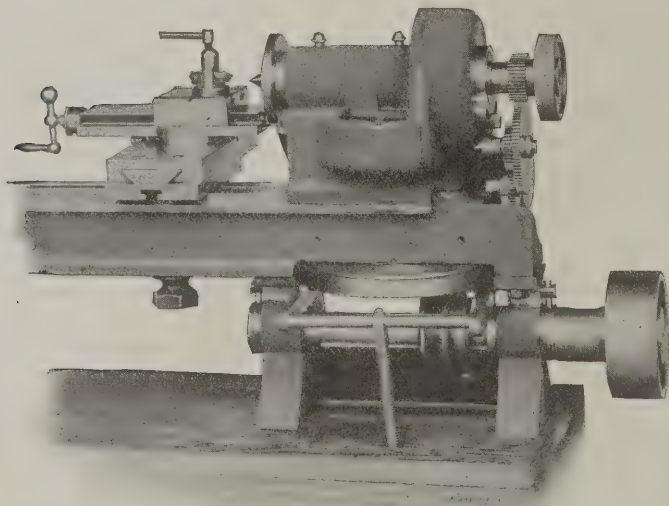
Rear View of Headstock and Friction Drive, showing Foot-pedal Release
